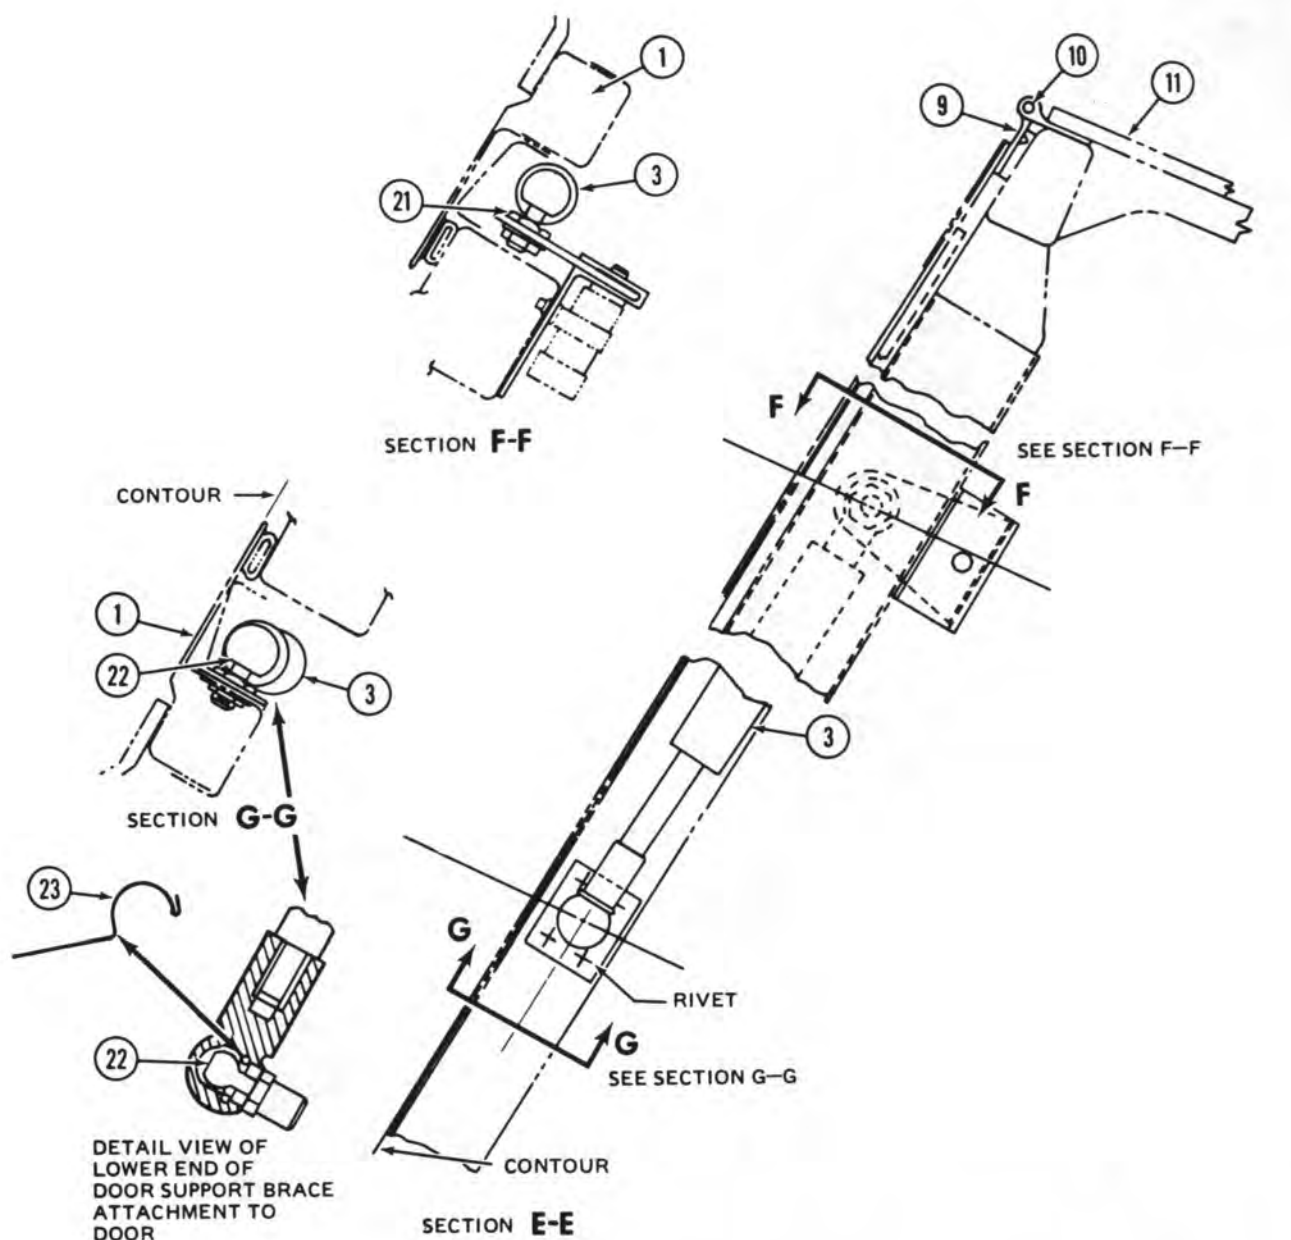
Pilot Door — Installation (Sheet 1 of 3)
